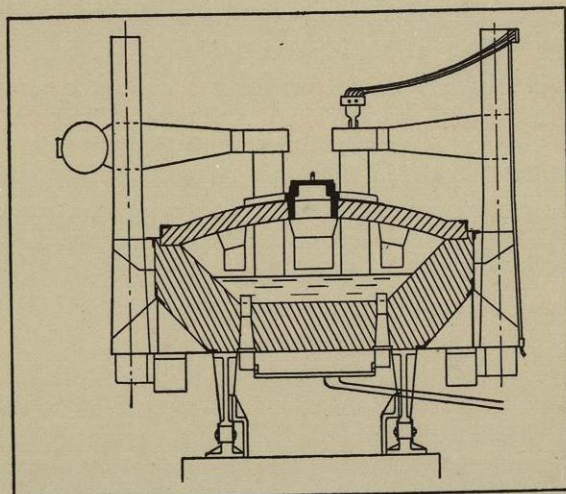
Sectional Elevation of latest 8-ton Girod Furnace.
